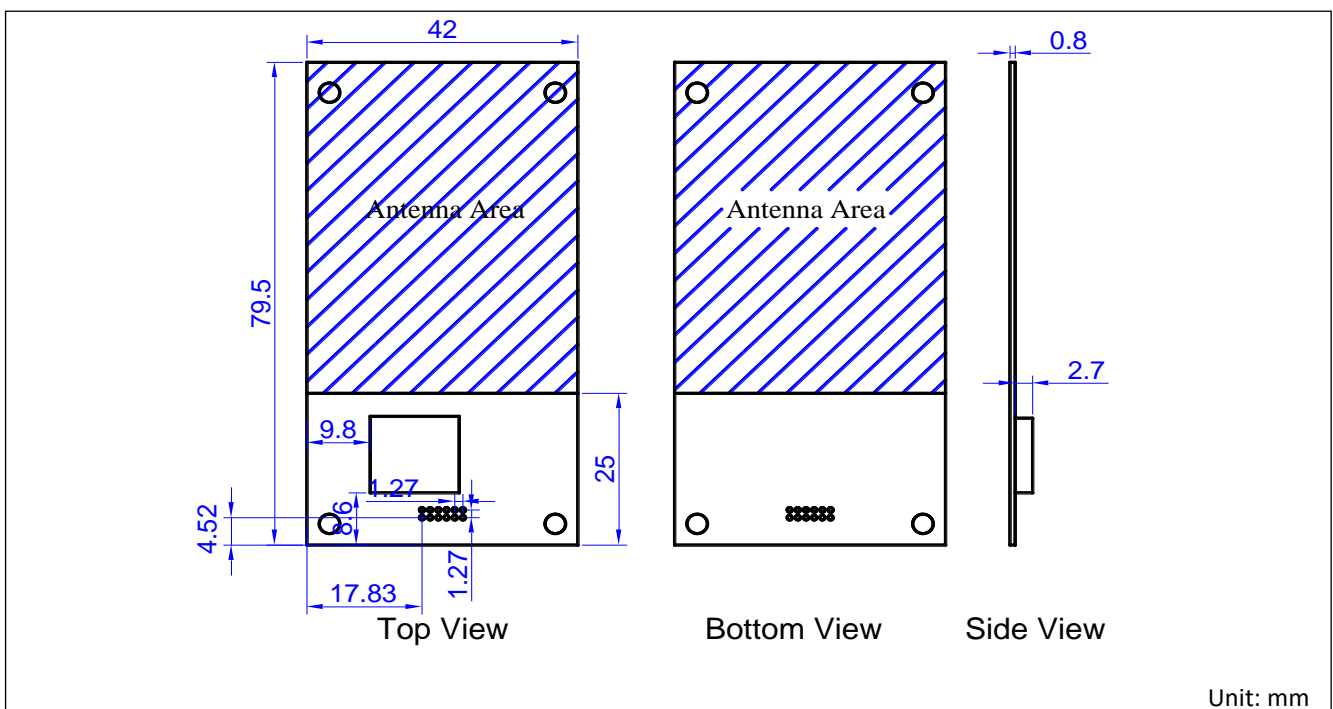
Mechanical Dimension of the BDE-RF7970A Module
